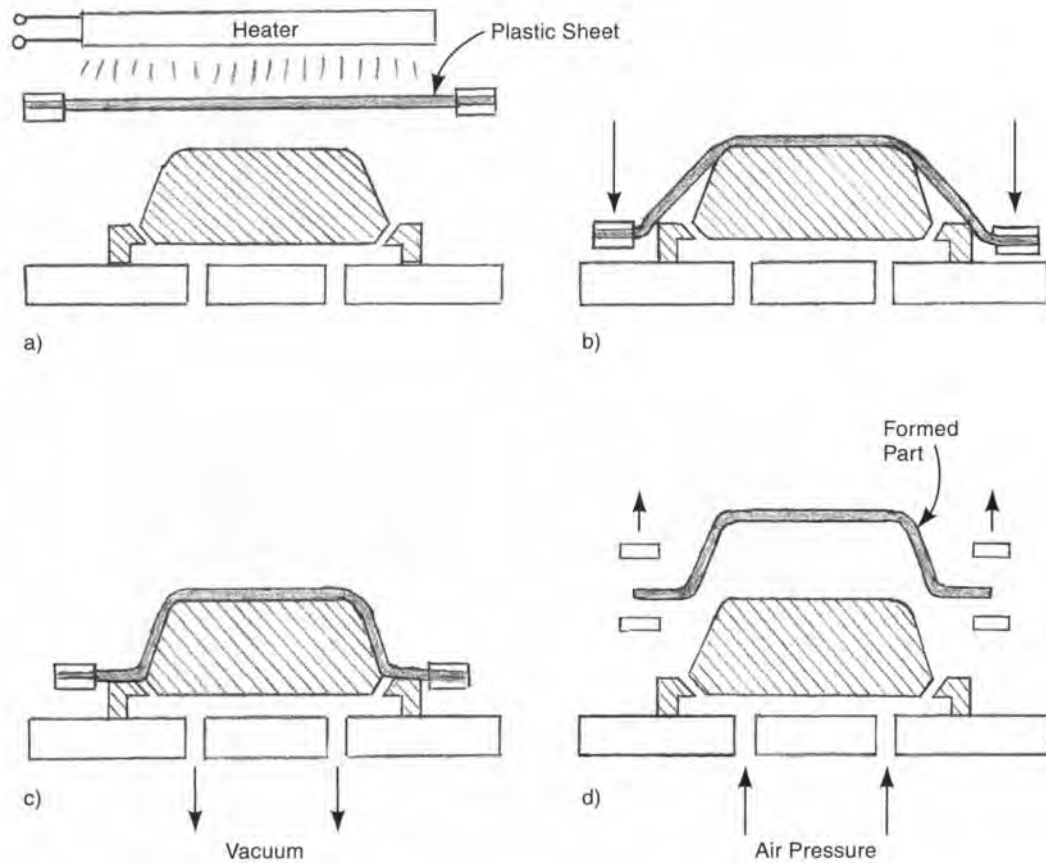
D3 Drape vacuum forming. a) The plastic sheet is placed above the male mold and heated. b) The heater is retracted and the sheet is draped over the mold. c) A vacuum is applied to the underside of the sheet, drawing it tightly against the mold. d) When the sheet has cooled and hardened, the vacuum and grippers are released and positive air pressure forces the sheet off the mold.
